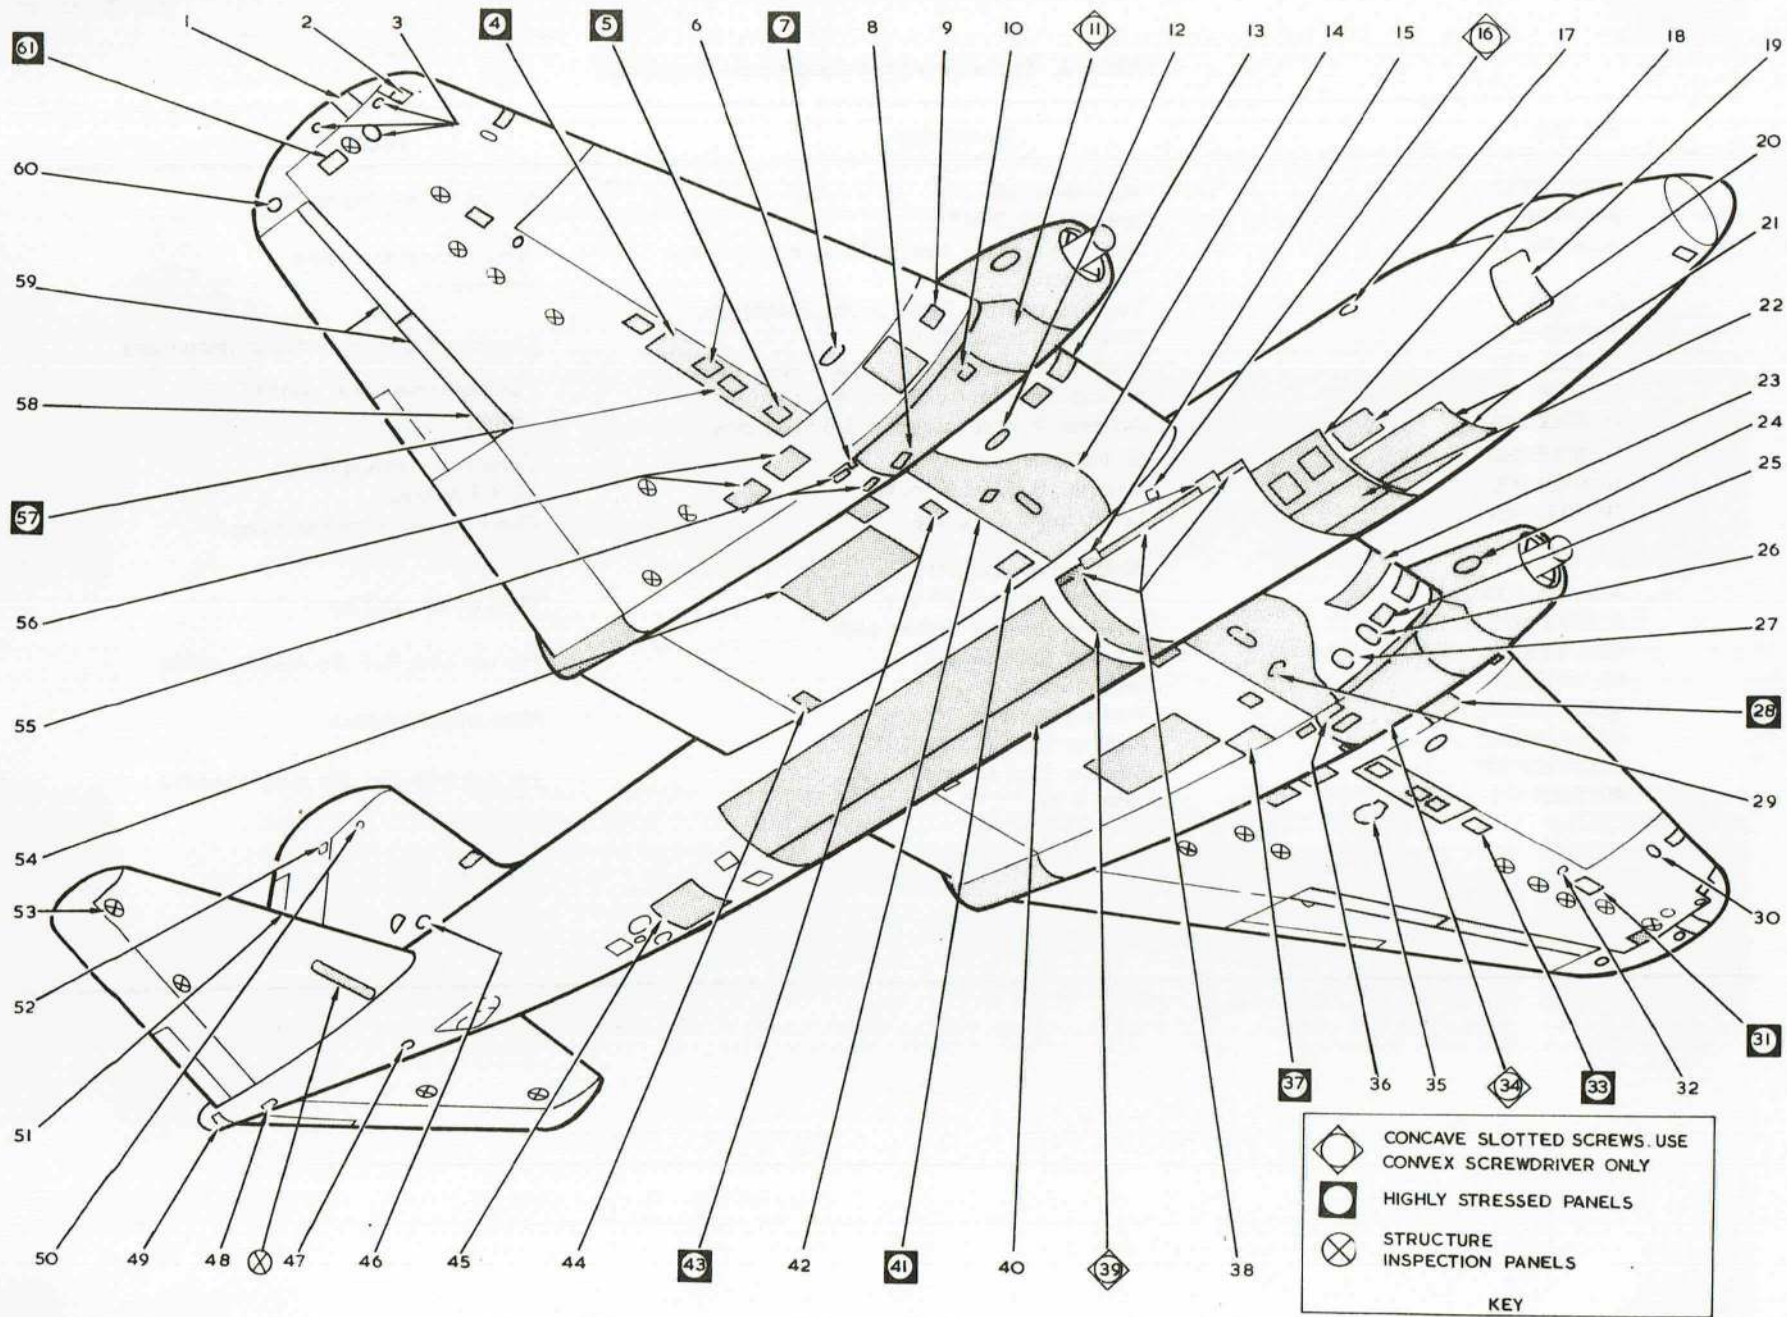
ACCESS PANELS LOWER SURFACE AND STARBOARD SIDE
